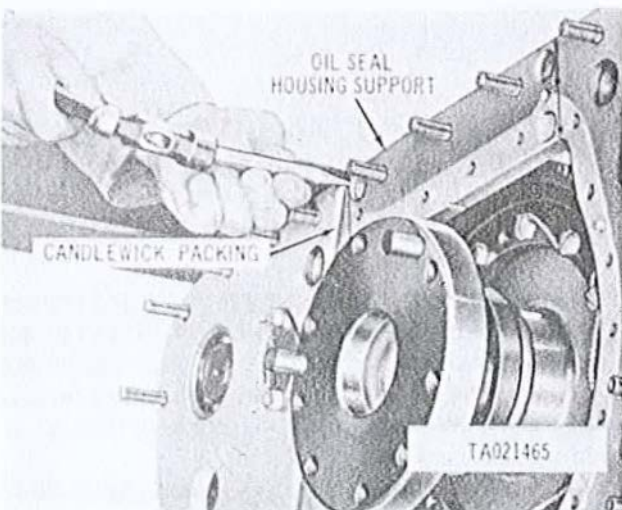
Installing candlewick packing between crankcase and oil seal housing support.
